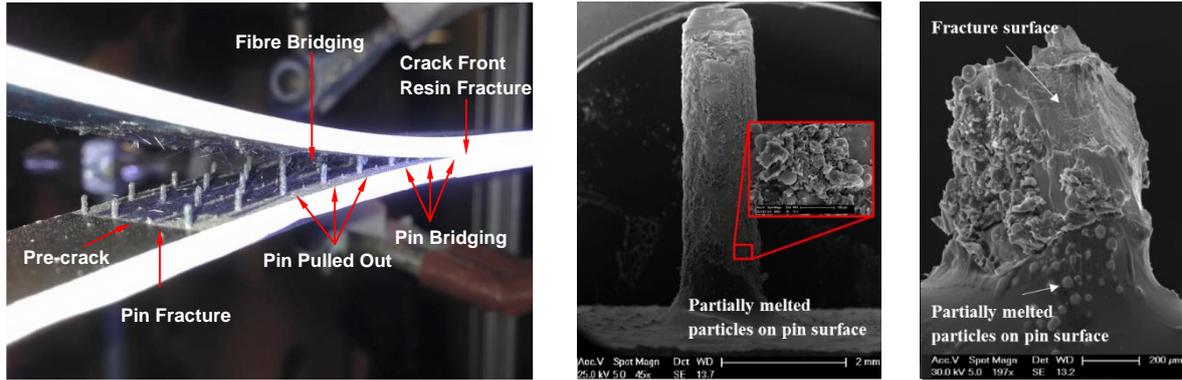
Fracture mechanisms for pin-reinforced hybrid joints (adapted from [8])
